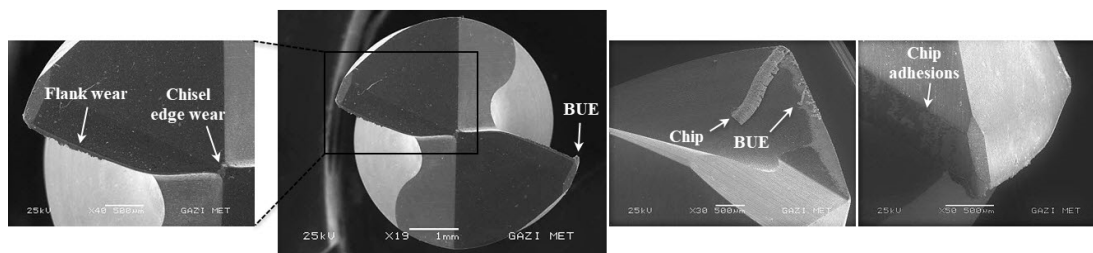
Tool wear types on TiAlN coated twist drill after three holes at 15 m/min under dry conditions.
